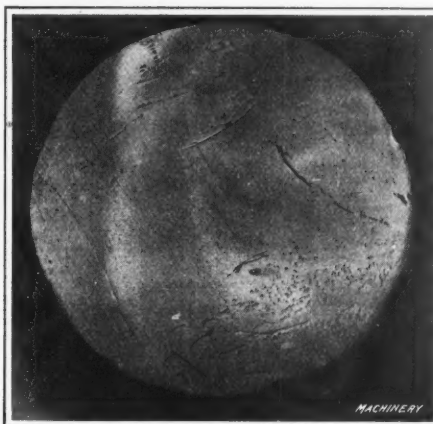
Section of Defective Weld in Steel Bar
